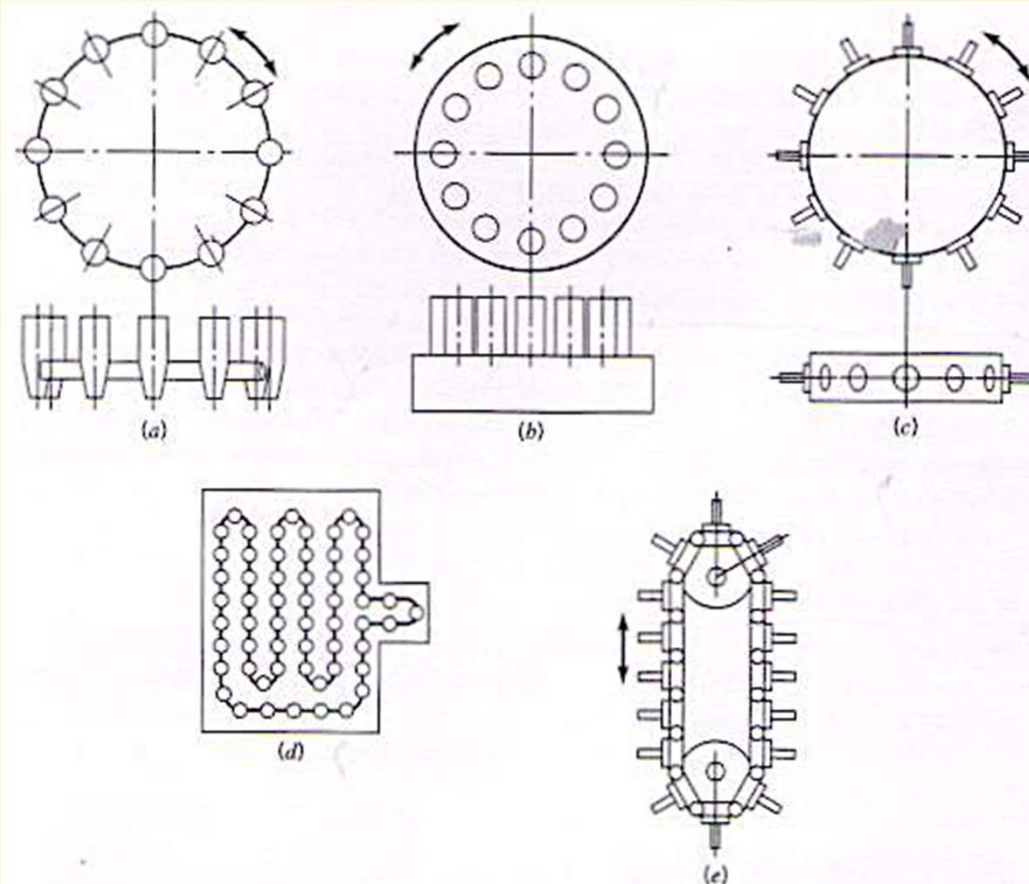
Various types of tool magazines: (a) disk type, (b) drum type, (c) turret type, (d) chain type, and (e) chain type. (Kusiak, Andrew: *Intelligent Manufacturing Systems*, © 1990, Figure 2.23, p. 40, reprinted by permission of Prentice Hall Inc., Englewood Cliffs, NJ.)
